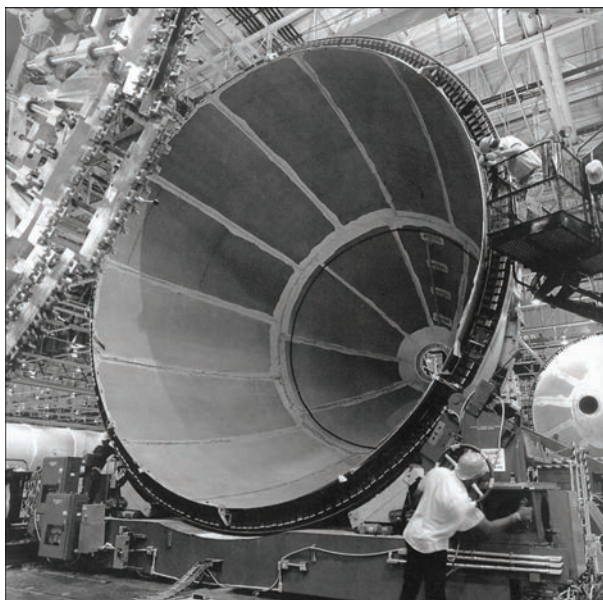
Welding of the dome of external fuel tank of Space Shuttle vehicle (USA)
